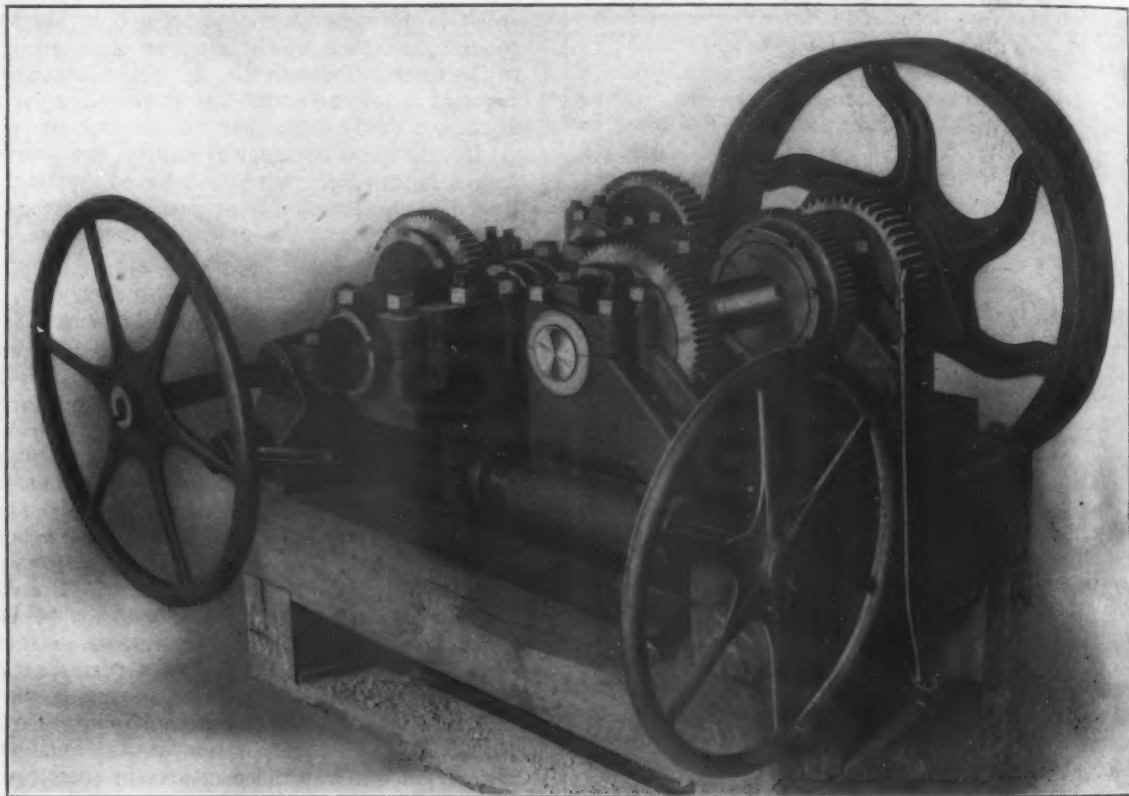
Operating Side of a New Gear Rolling Machine Invented by Harold N. Anderson, Dayton, Ohio.
